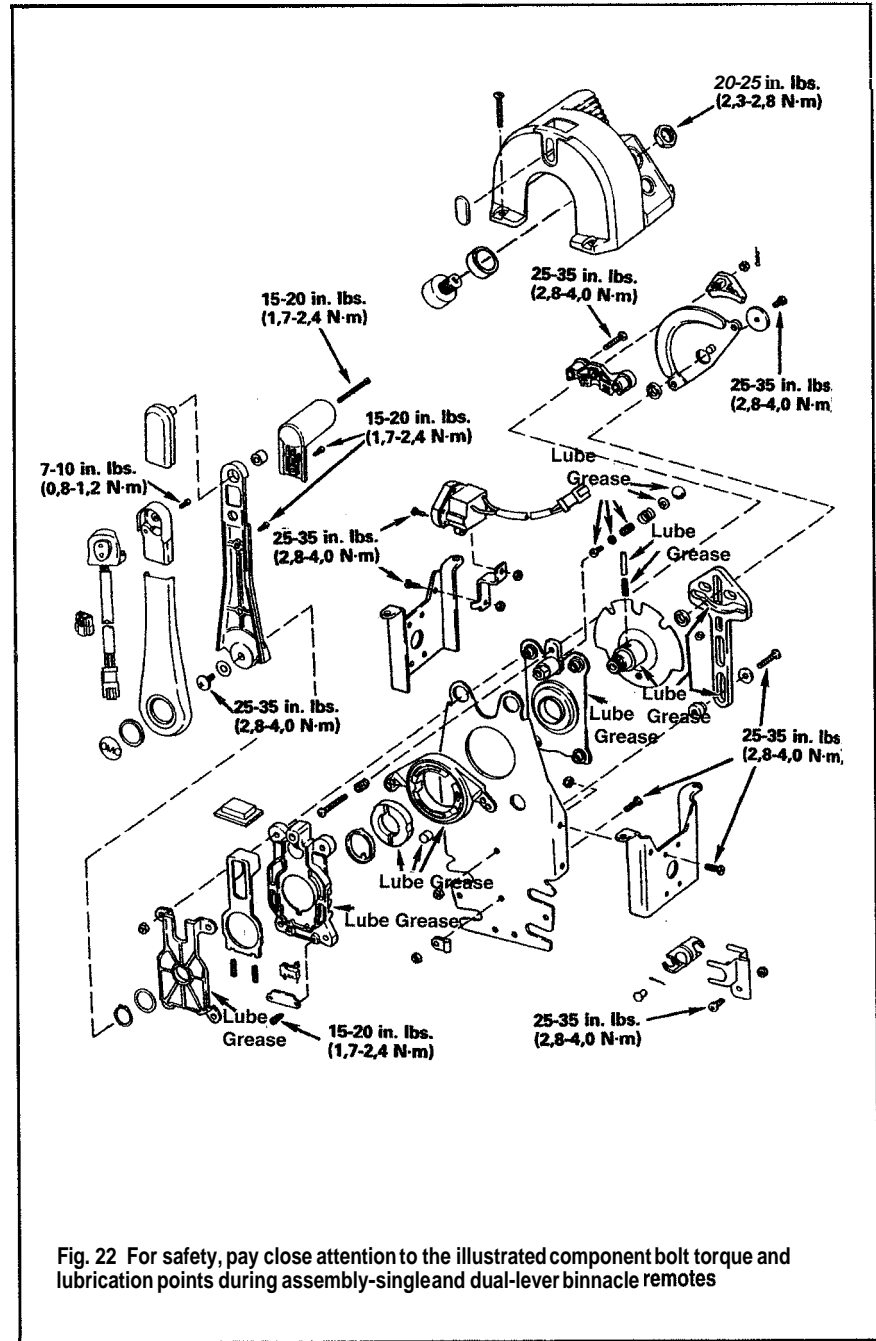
For safety, pay close attention to the illustrated component bolt torque and lubrication points during assembly-single and dual-lever binnacle remotes
